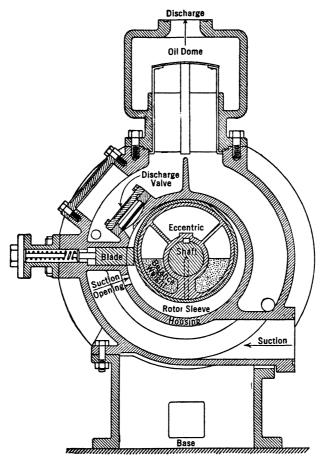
Cross section of a rotary compressor with a sleeve rotor.
